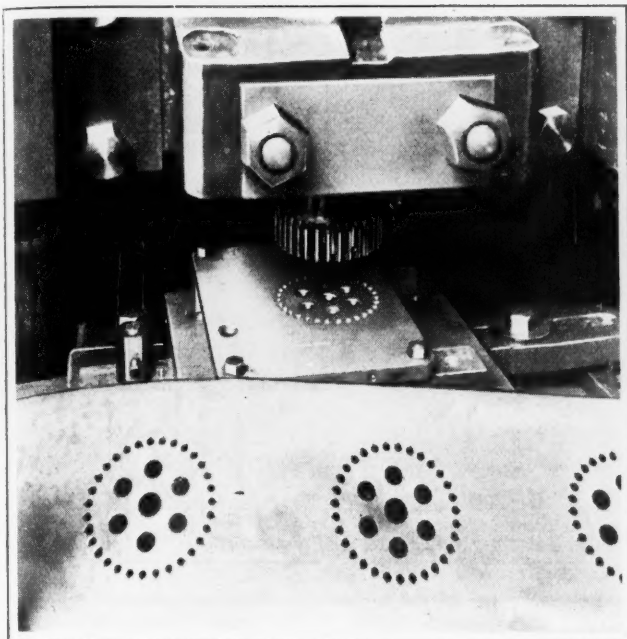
Press equipped with Die for piercing the Rotor Holes
